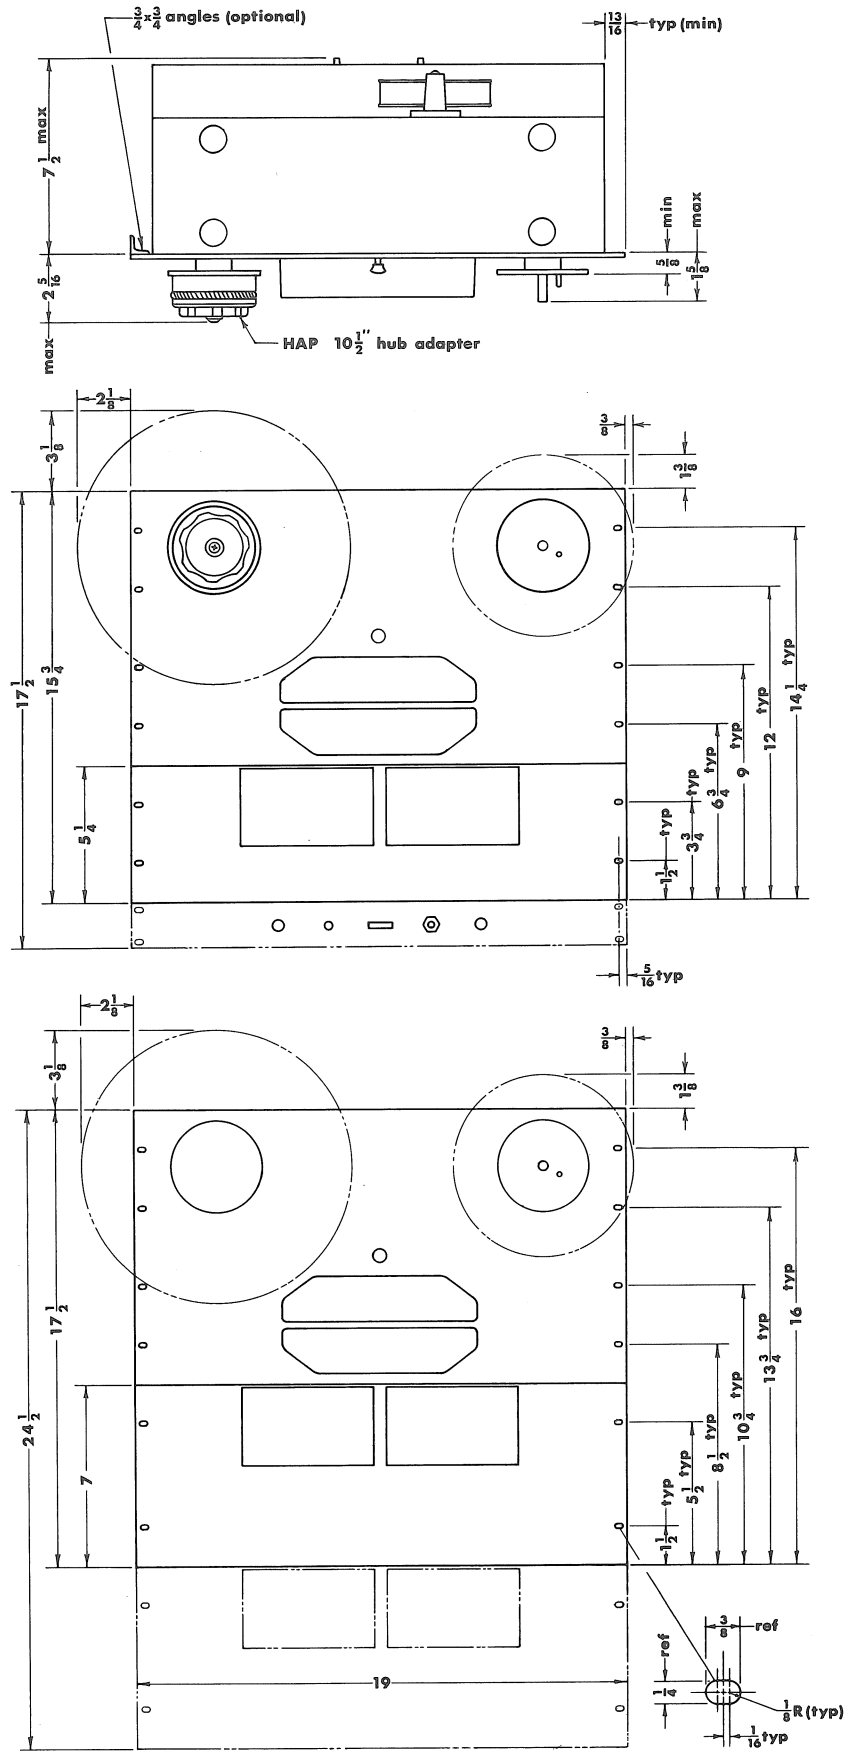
3 MOUNTING DIMENSIONS (RECORDERS)
